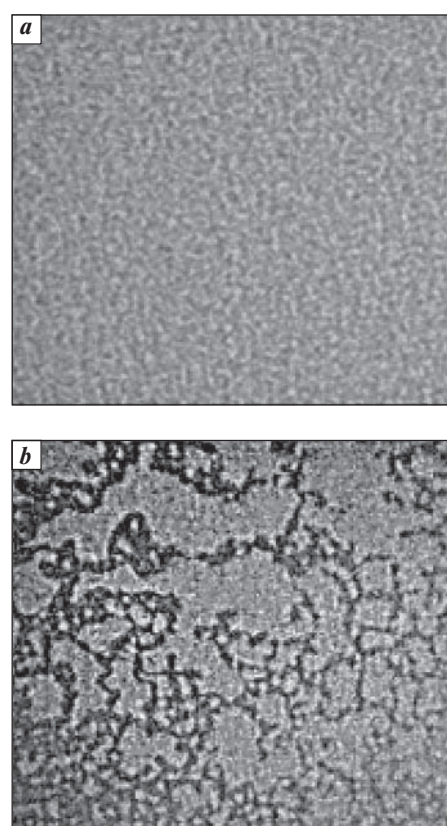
X-ray photographs of the soldered joint 4B before (a) and after (b) thermocycling (without magnification)
